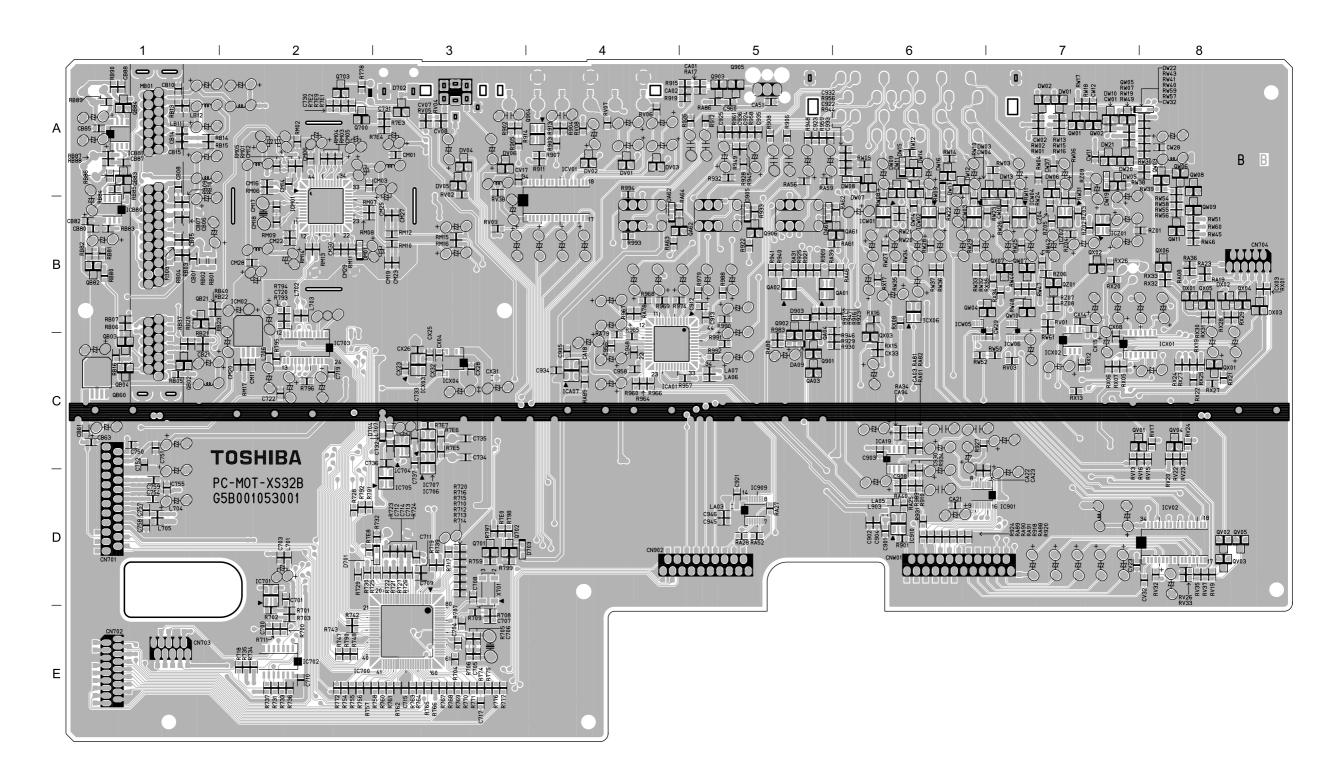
EU05 Mother PC Board (Bottom side)
